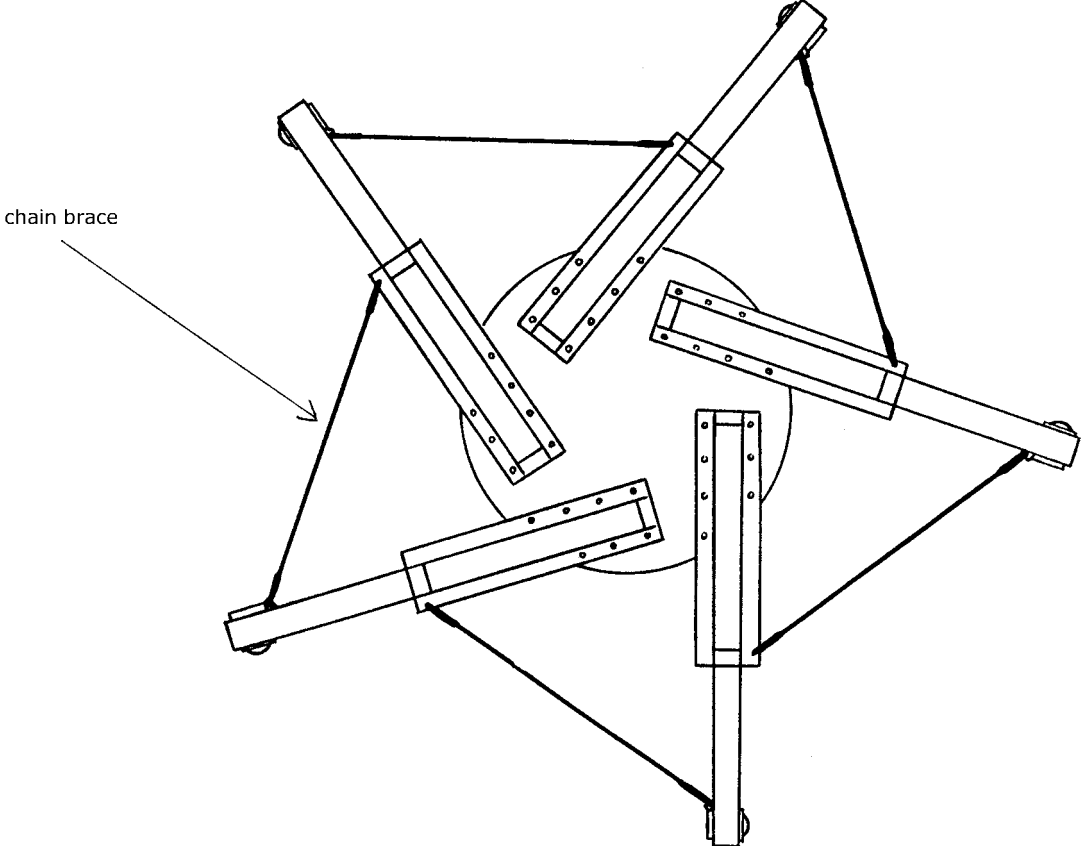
Overhead view of tongue arrangement, showing chain braces.
